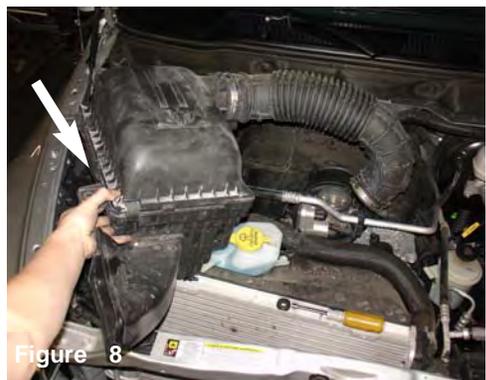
Lift factory air box cleaner and pull entire air box and duct assembly out of engine bay.
